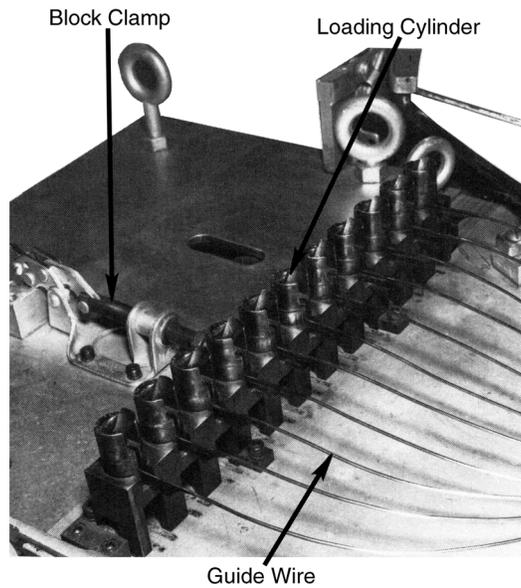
FUEL ELEMENT LOADING BLOCK.
